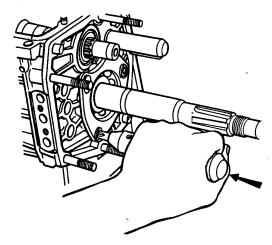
Removing Fastening Screws of Main Shaft Intermediate Bearing Locking Plate with Power Screwdriver. Arrow shows direction of impact stroke (when striking the screwdriver with a hammer)
